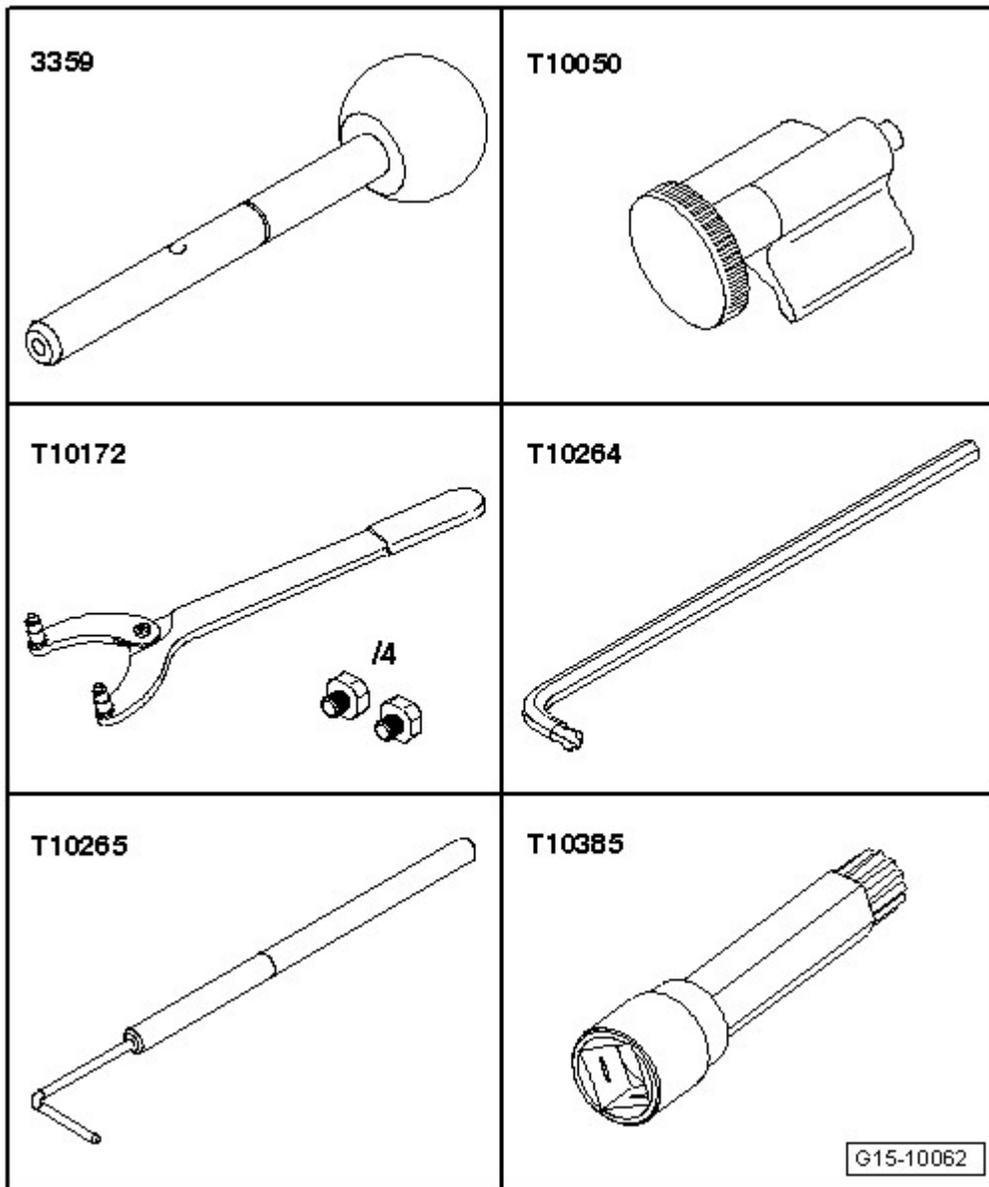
Special Tools And Workshop Equipment (3 Of 4)
